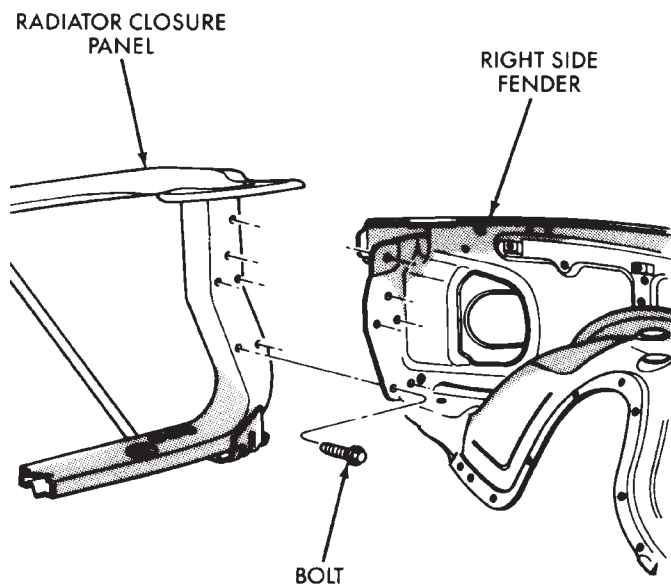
Right Fender to Radiator Closure Panel Fasteners
